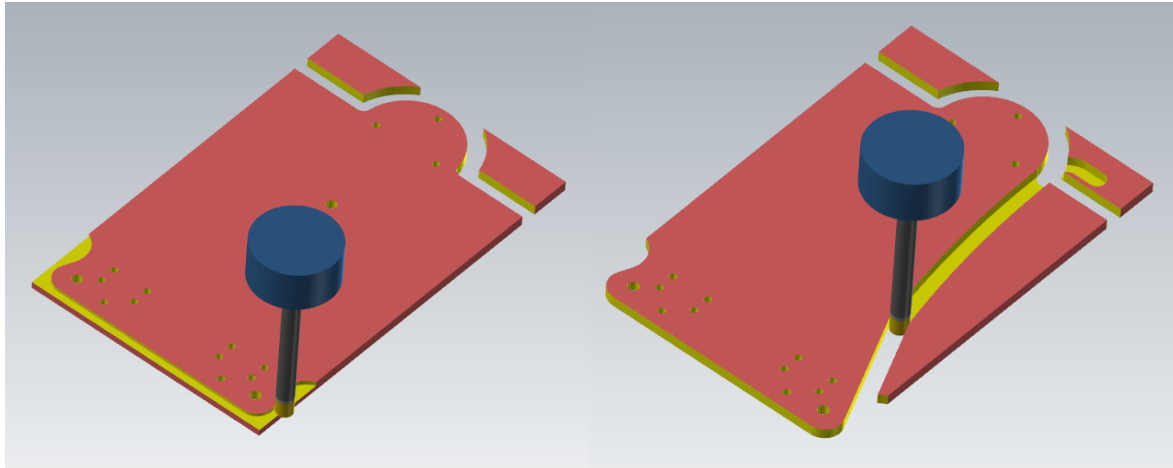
(a) Workpiece rear end milling cycle on the left and (b) workpiece side milling cycle on the right
